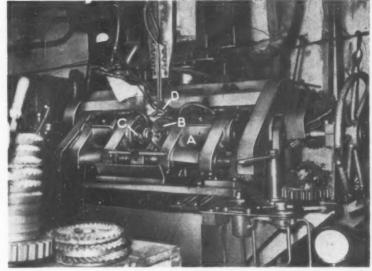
An Experimental Hot-rolling Set-up for the Production of Spiral Bevel Gears in the Forging Department of the TsNIITMASh Research Institute. Many similar Hot-rolling Units for Spur Gears are Reported to be in Use in Soviet Plants
